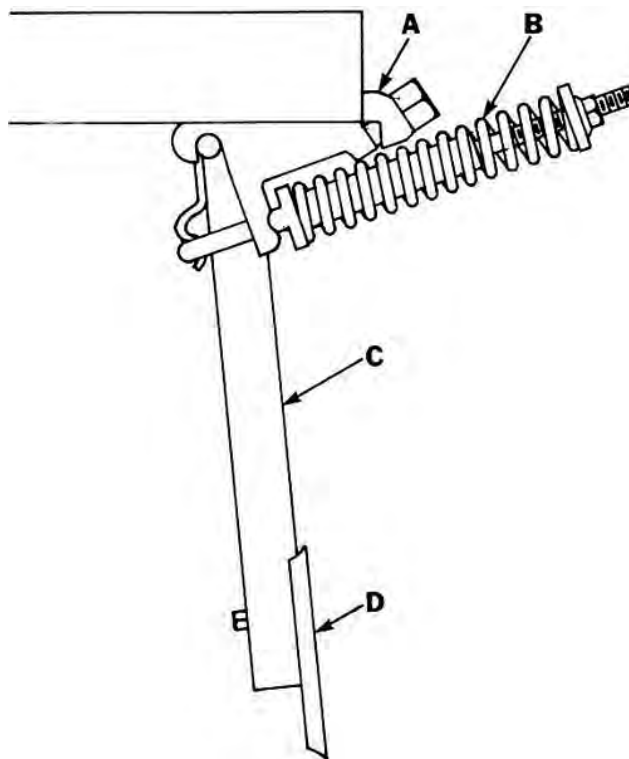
Hoe Assembly: (A) Frame Clamp, (B) Cushion Spring, (C) Opener Tube, (D) Hoe Opener.
